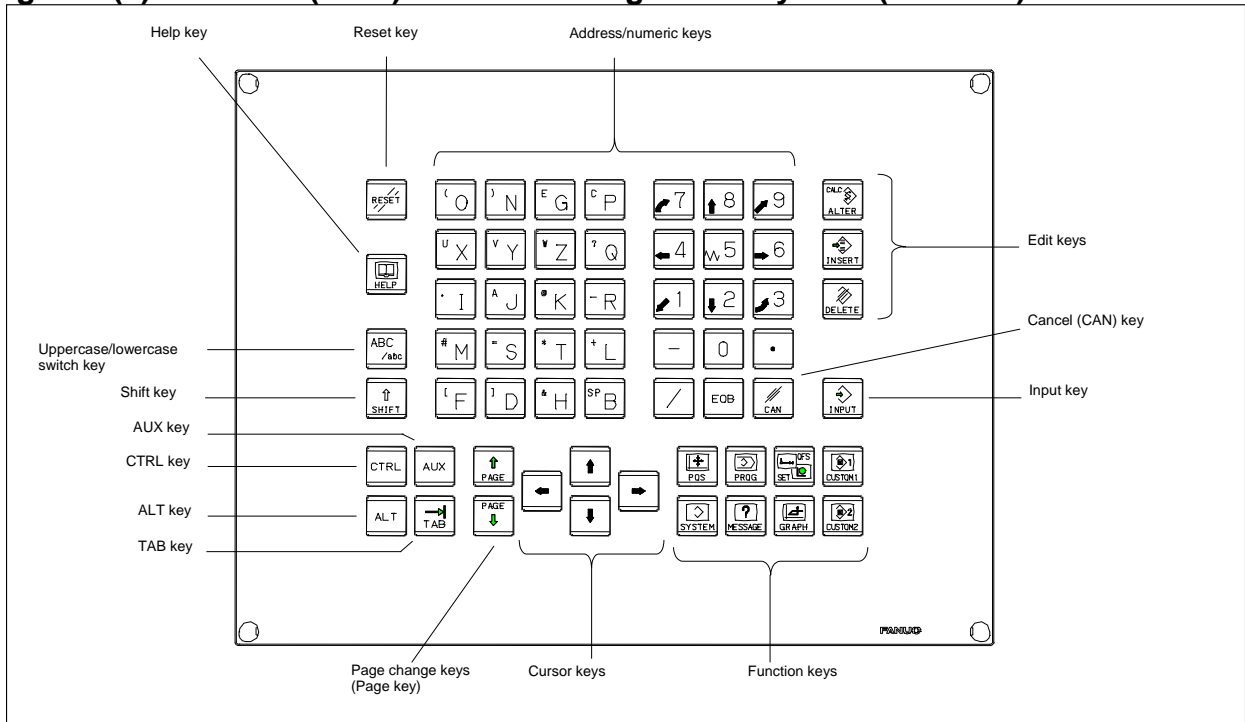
(d) MDI unit (small type) with machining center system (M series)
